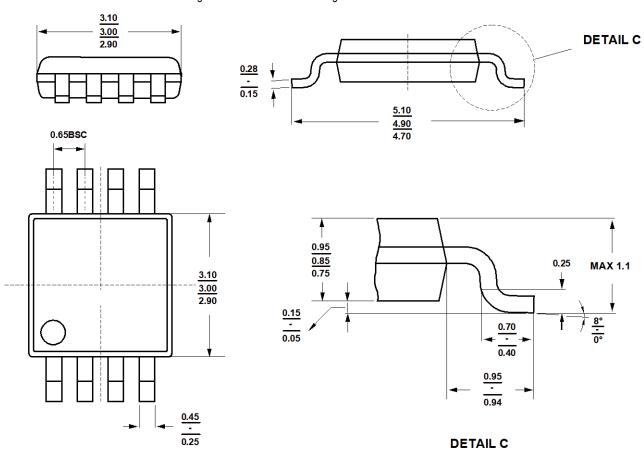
8-Lead MSOP Package Dimensions shown in millimeters
